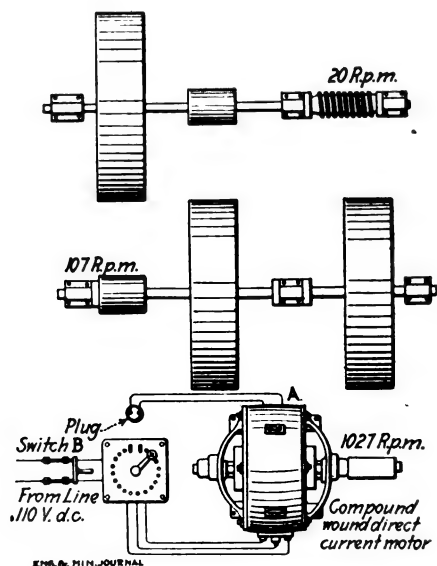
ARRANGEMENT FOR WINDING THE OLIVER FILTER.
